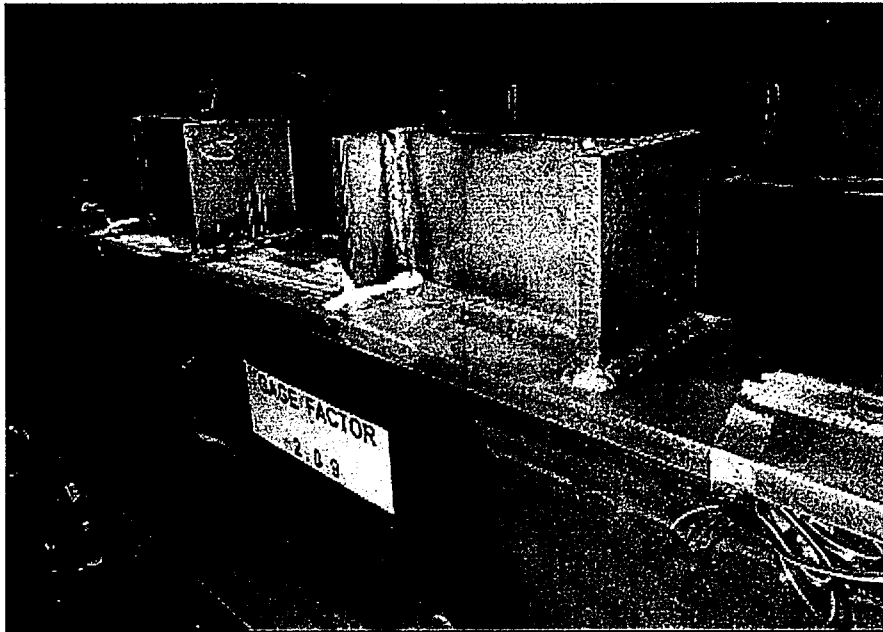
AL-6XN Bulkhead Attachments Fillet Welded to the Flange of the Test Specimen
